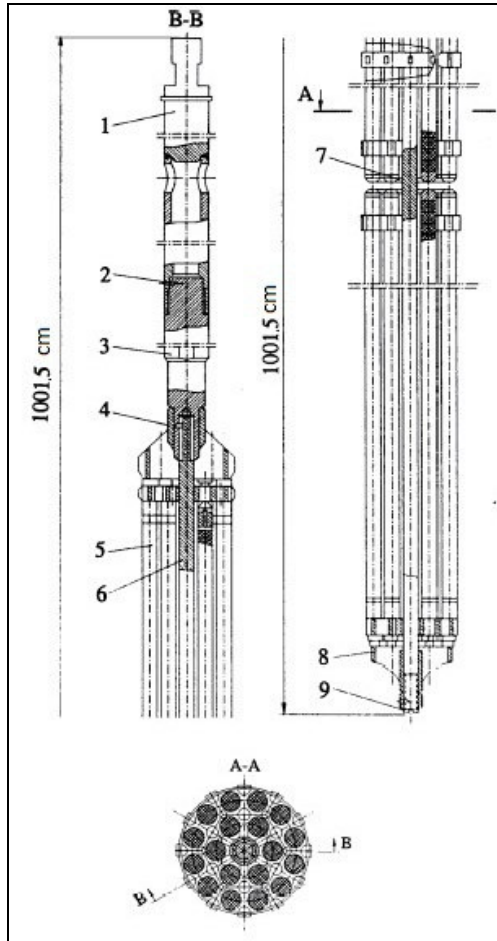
RBMK-1000 fuel assembly: 1 – suspension bracket; 2 – the upper plug; 3 – adapter; 4 – connector; 5 – fuel rod; 6 – carrier rod; 7 – trailer; 8 – the lower head; 9 – retaining nut.
